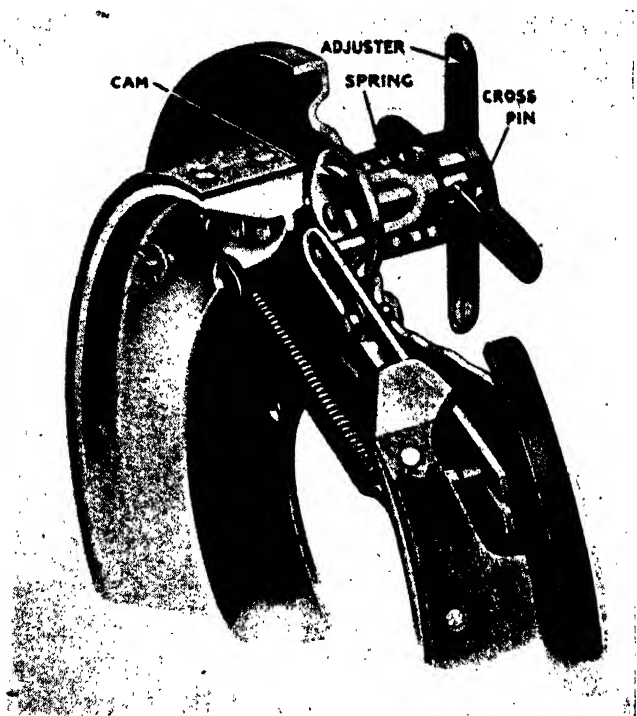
A "FINGER-TIP" ADJUSTER DEVELOPED FOR LOCKHEED BRAKES WHICH AUTOMATICALLY SPRINGS BACK TO GIVE THE CORRECT SHOE CLEARANCE
